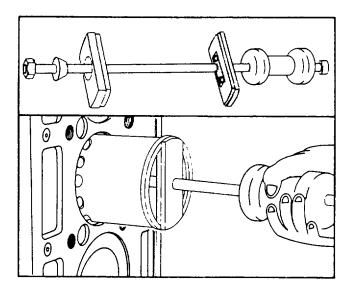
Removing Cylinder Liner Using Tool J1918-02.
